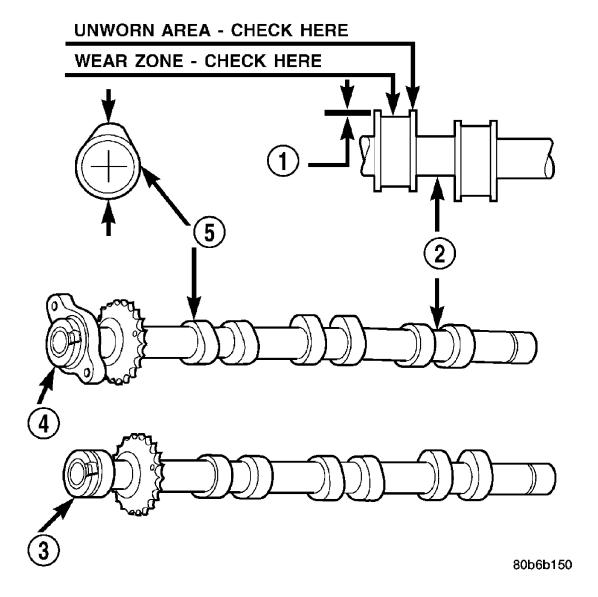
Inspecting Camshaft Courtesy of CHRYSLER LLC
